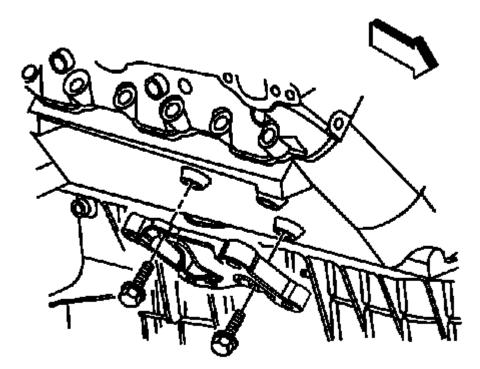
View Of Right Side (Left Side Similar) Engine Mount Side Bracket & Bolts Courtesy of GENERAL MOTORS CORP.
